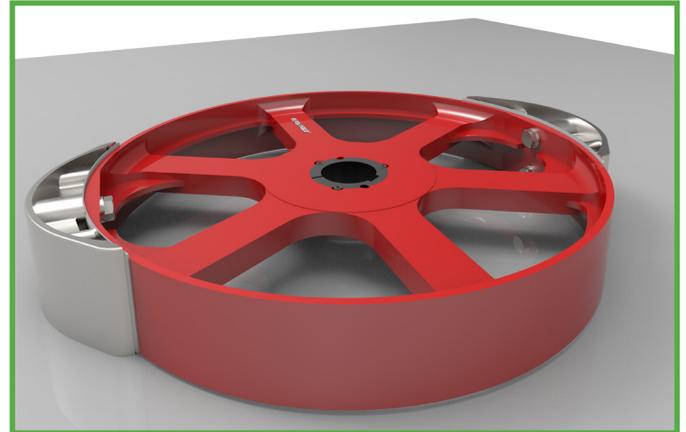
Mounting Rotor Shoes on the Rotor (Step 2)
